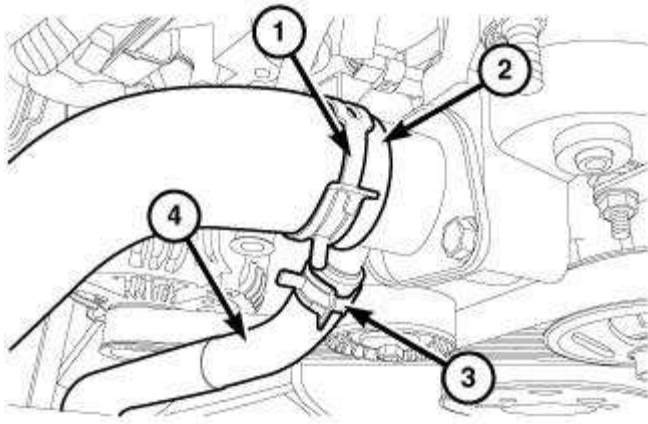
Upper Radiator Hose, Clamp, Oil Cooler Return Line Hose & Clamp
